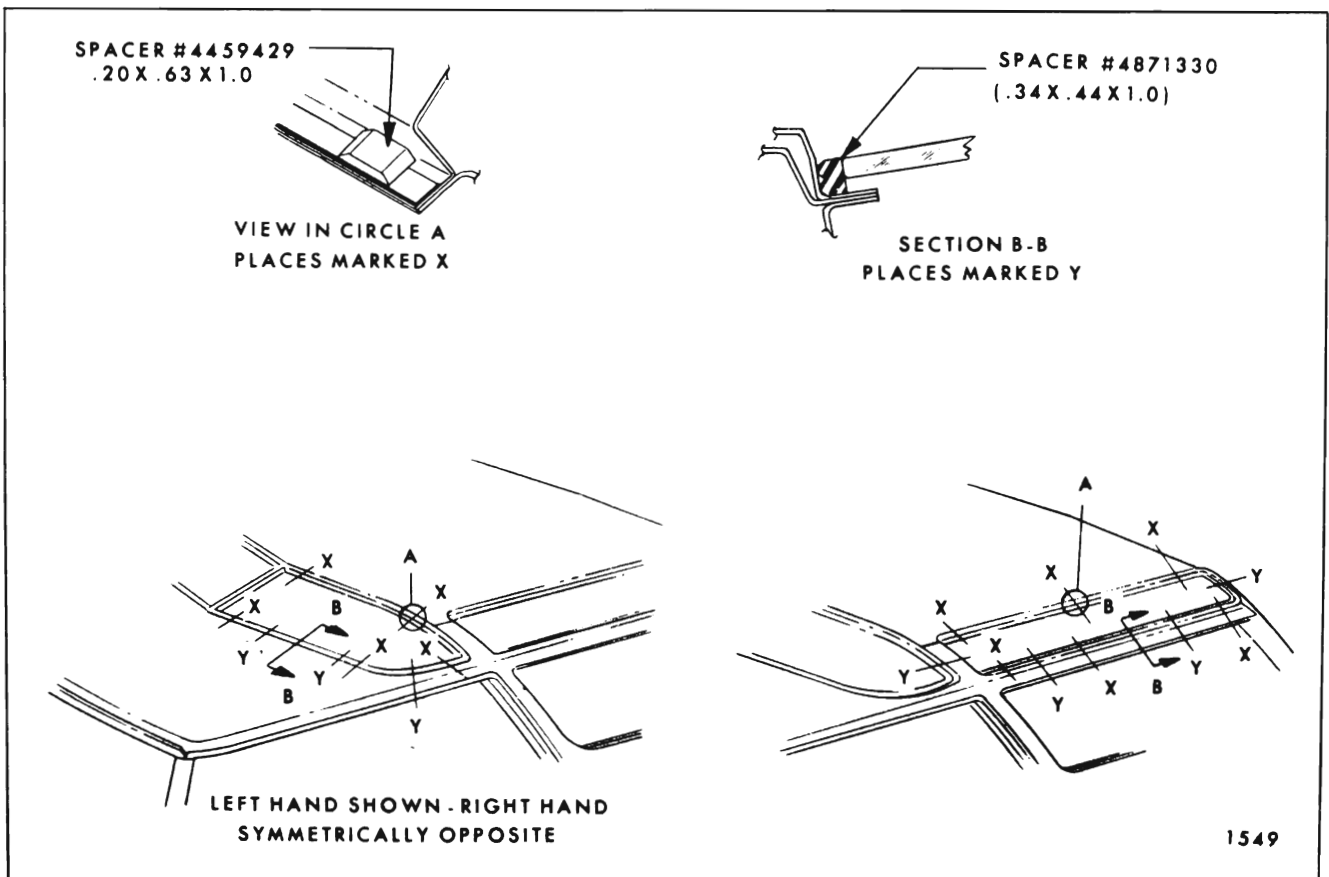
Front and Side Skylight Rubber Spacer Installation
